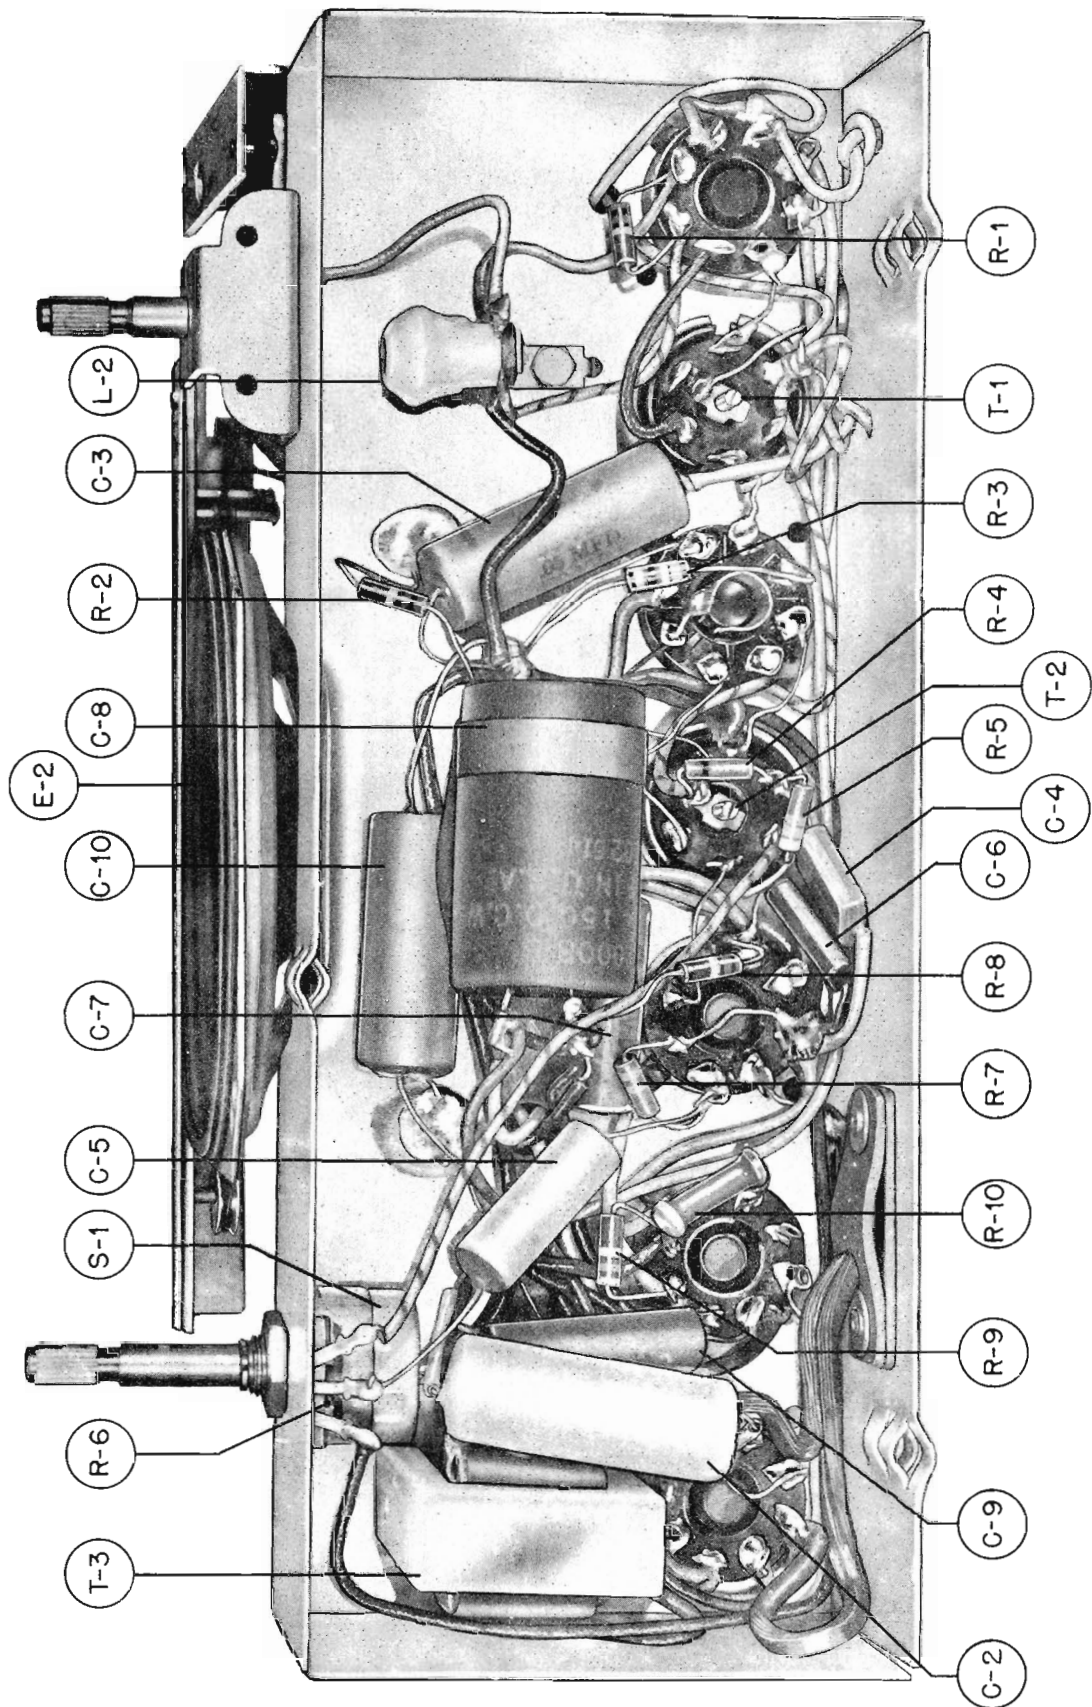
BOTTOM VIEW (CHASSIS HS-50)
